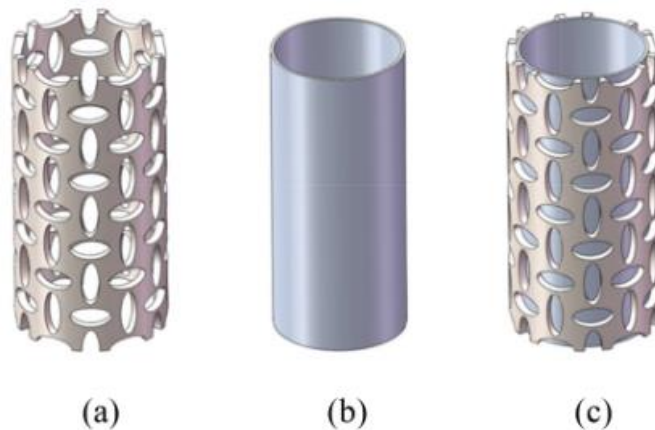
Designs of: (a) auxetic tube; (b) conventional tube; and (c) hybrid tube [26]
